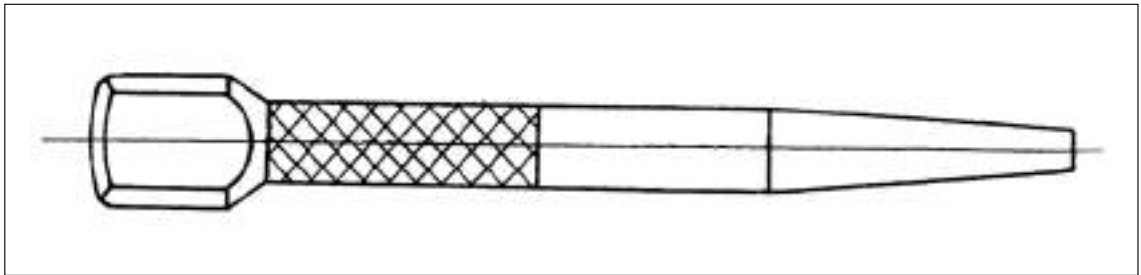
(Rear Bearing of Countershaft) Disassembly Lever
